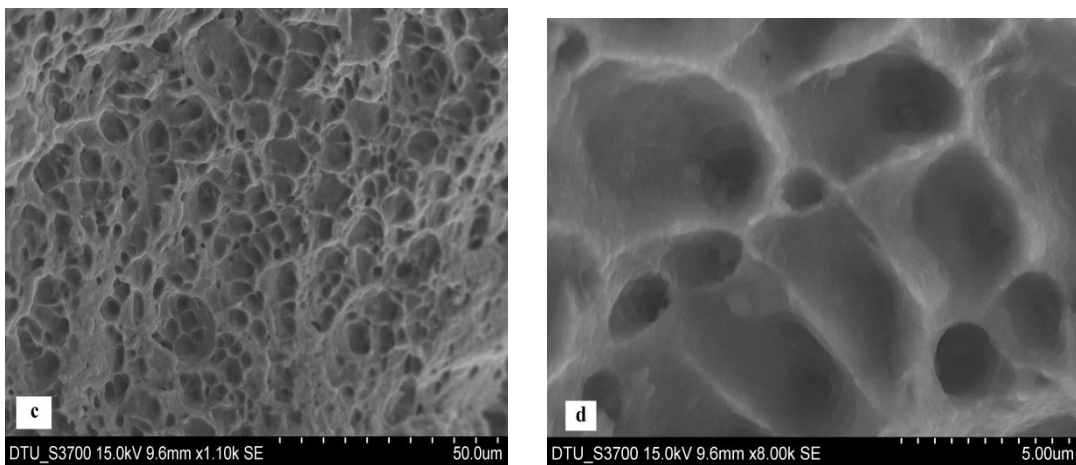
(c & d) FSPed one pass specimen tensile fractography (lower & higher magnification)
